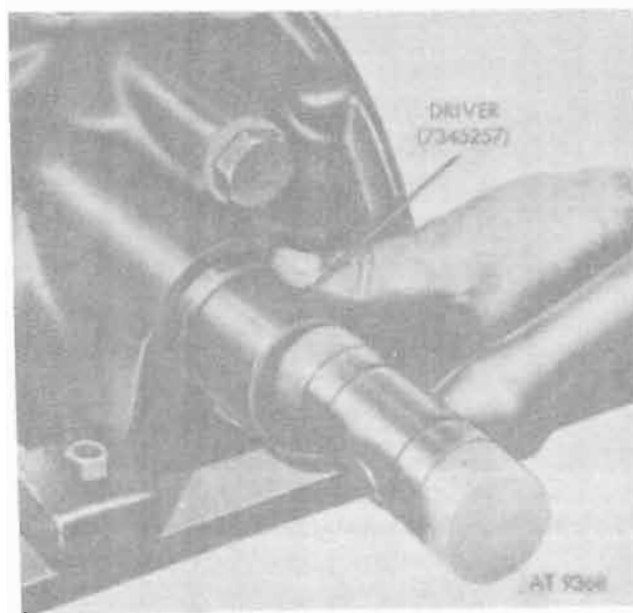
Using driver (7345257) to install pinion shaft rear bearing seal, spacer, and bearing.
